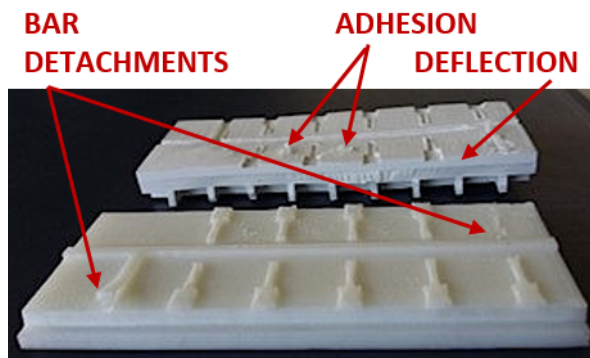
Defects like deflection of the green body and damages of its surface through a too strong adhesion to the mould insert as well as detachments of bars on top of the mould inserts structure.
